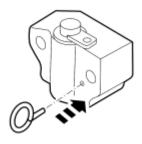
Pushing Back And Holding Ratchet Mechanism Courtesy of FORD MOTOR CO.
